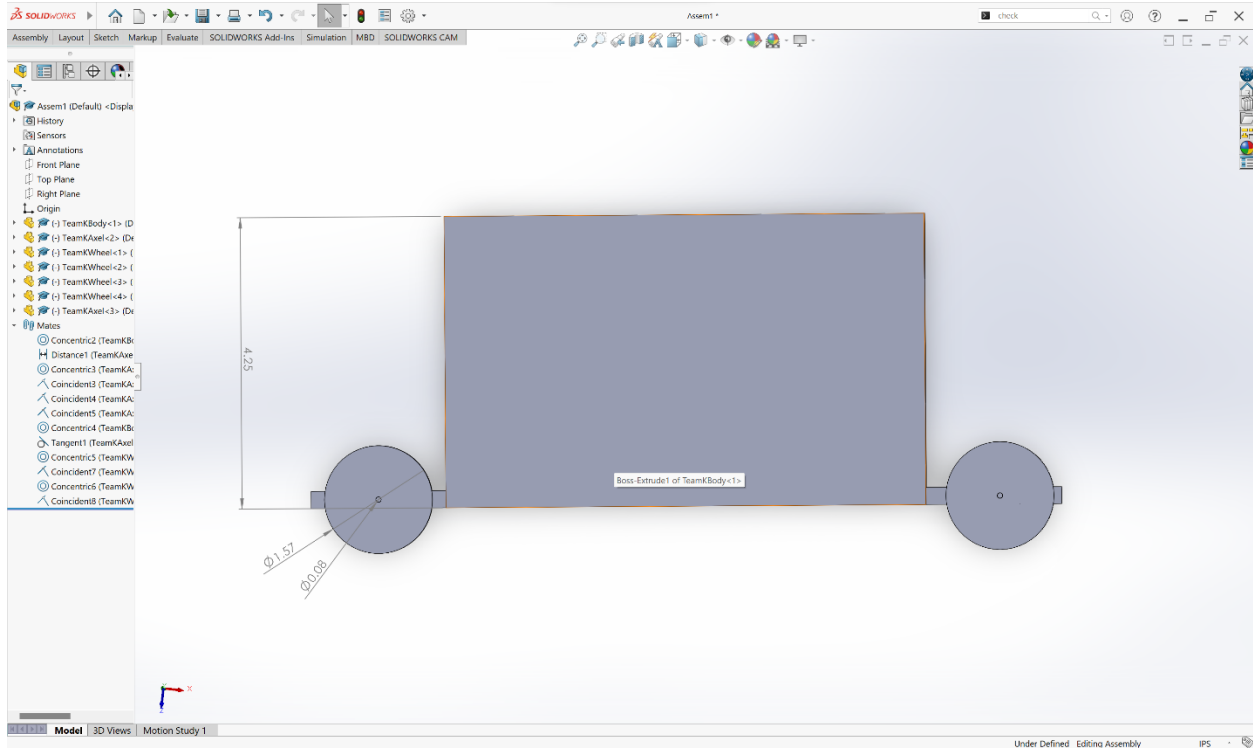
This is a front view of our wheels. It provides the diameter of the wheels and the hole where our axles will go through.
